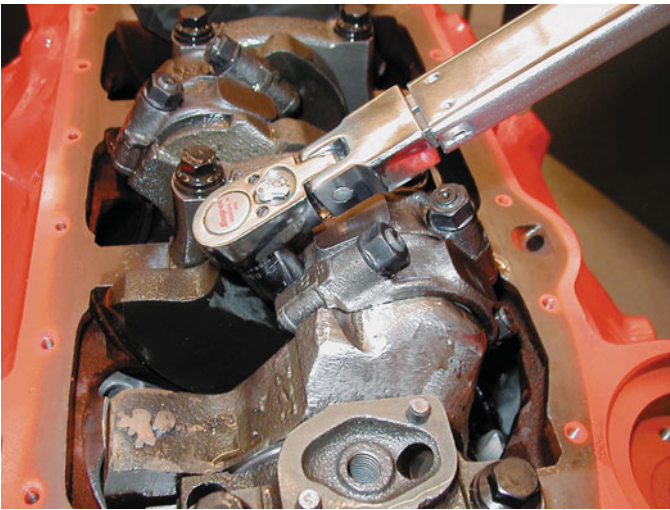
Using a torque wrench to tighten connecting rod nuts on an engine.
